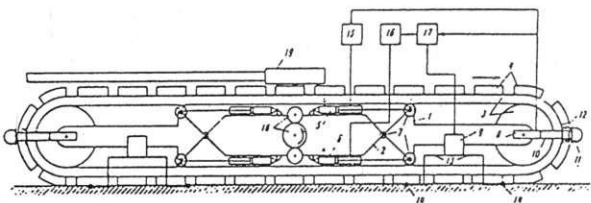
Design of a WCR capable of crossing from one surface to another: (1) platform; (2) chassis; (3) track mechanism; (4) gripper; (5),(6) correction cylinders; (7) hinges; (8),(9) switches; (10) probe; (11) obstacle sensor; (12) spring; (13) support sensor; (14) supports; (15),(16) valves; (17) relay element; (18) reduction gear; (19) feed channel.
